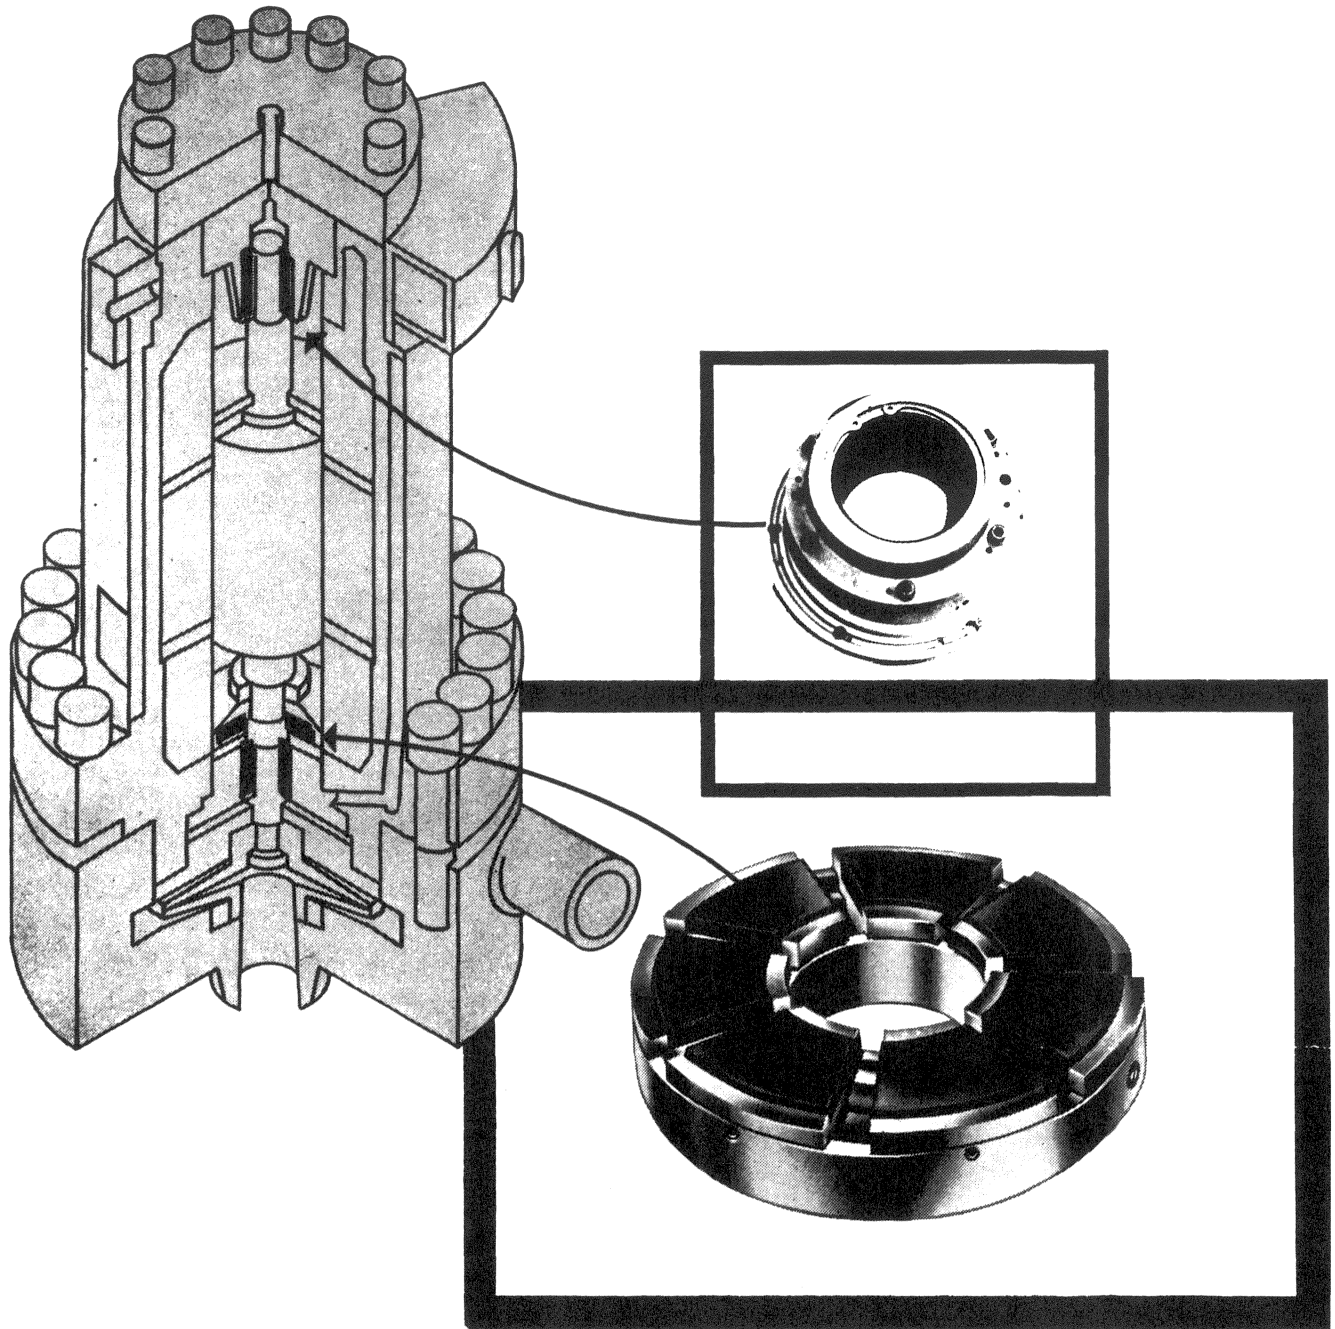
Water Lubricated Journal and Thrust Bearing in "Canned" Motor Pump for Pressurized Water Reactor. (bearings built by Abramovitz Associates, Inc.)
